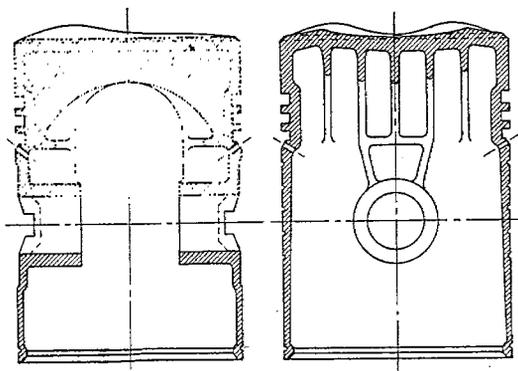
Sectional views of pistons 5 and 8 (aluminum alloy and cast iron)
